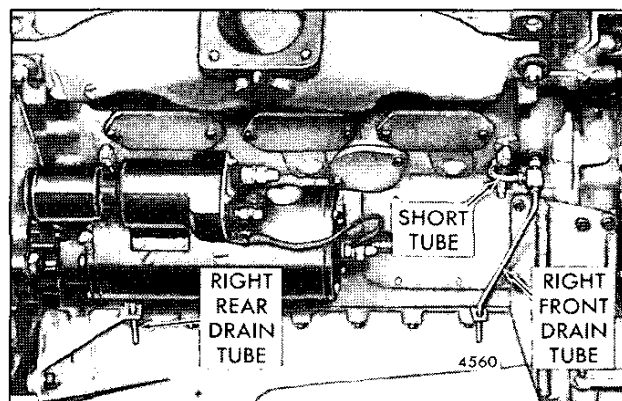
Air Box Drain Tube Mounting (8V Engine)
